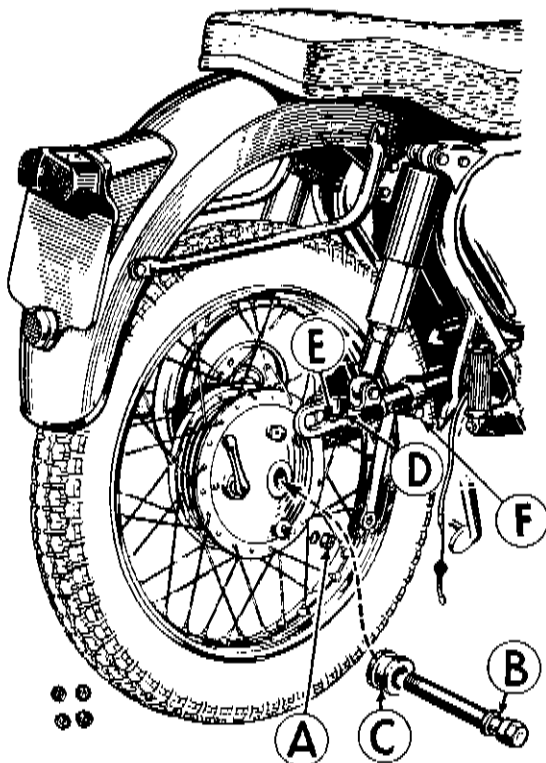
(e). Rear Wheel Removal and Rear Chain Adjustment
